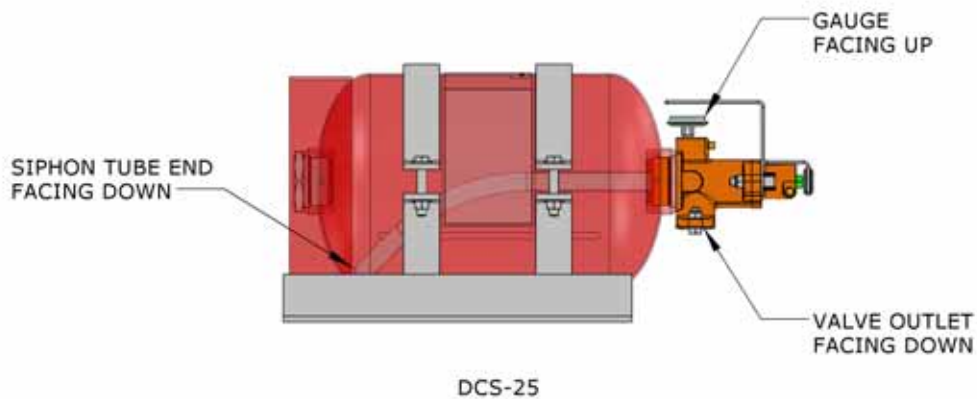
Horizontal Cylinder/Bracket Assembly
